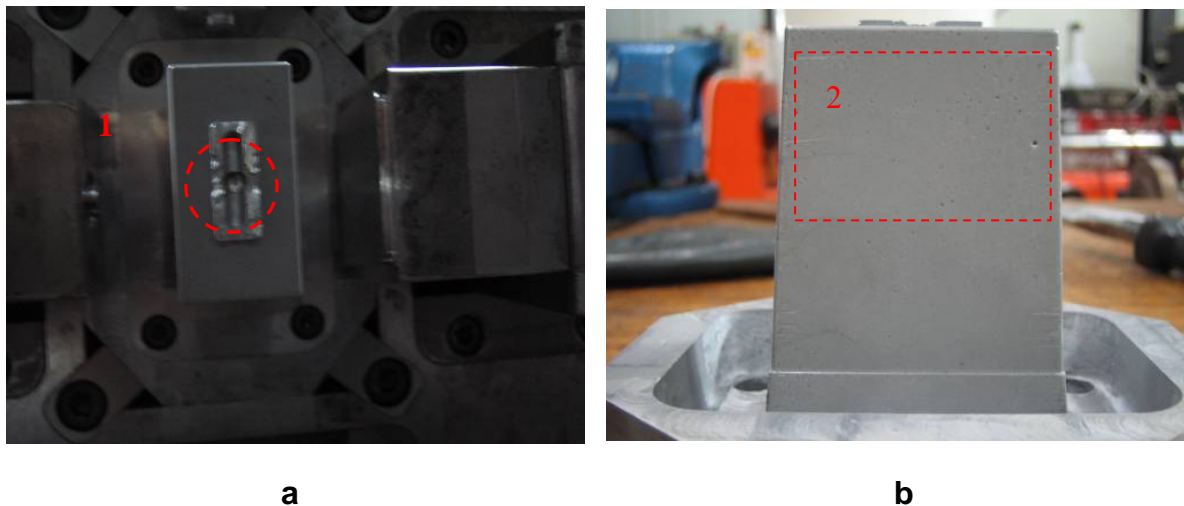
Failure of the epoxy/Al core moulding block: a) runner system, b) moulding surface
